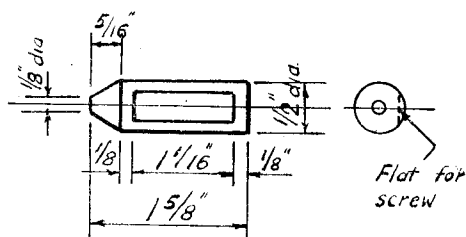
A fixed steady for the $3\frac{1}{2}$ -in. Drummond lathe
